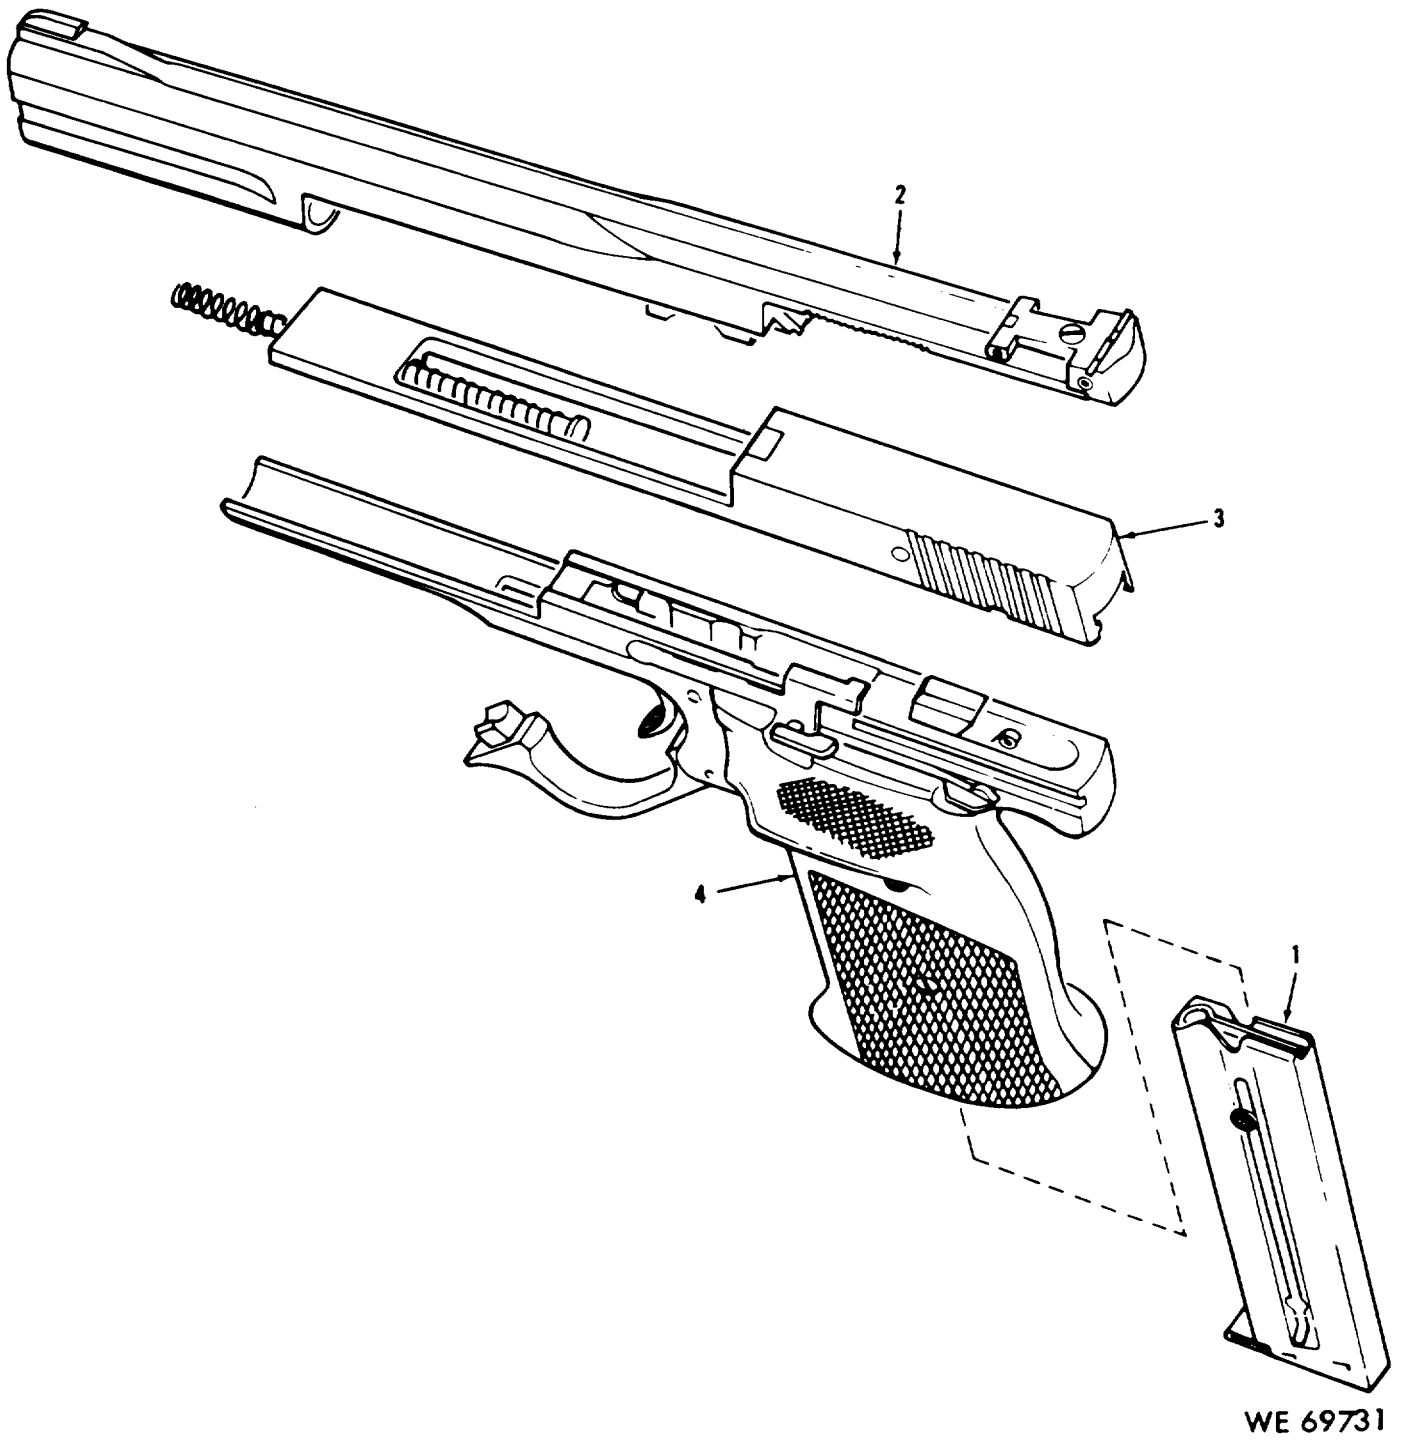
Major groups and assemblies-Model 46 Smith and Wesson cal. .22 automatic pistol-exploded view.
